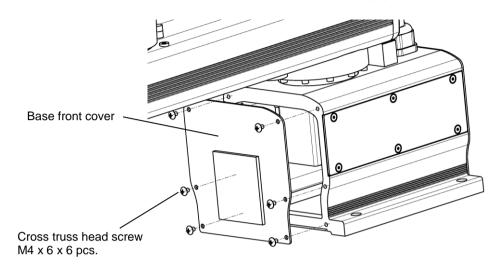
Base front cover (KHL-500, KHL-600, KHL-700)
